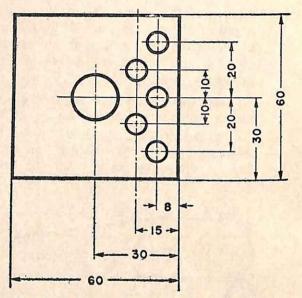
Aligned dimensioning from centre line and finished surface (IS: 696-1960)
